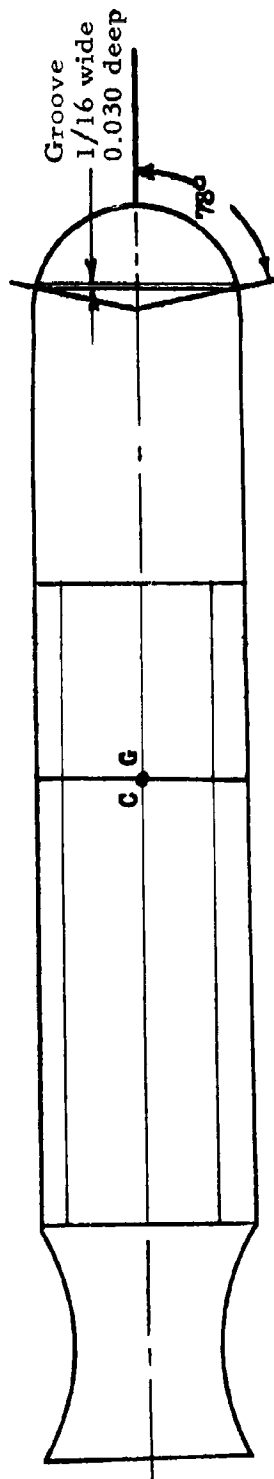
Missile With Grooved Head. Dimensions as shown in Fig. 1.
